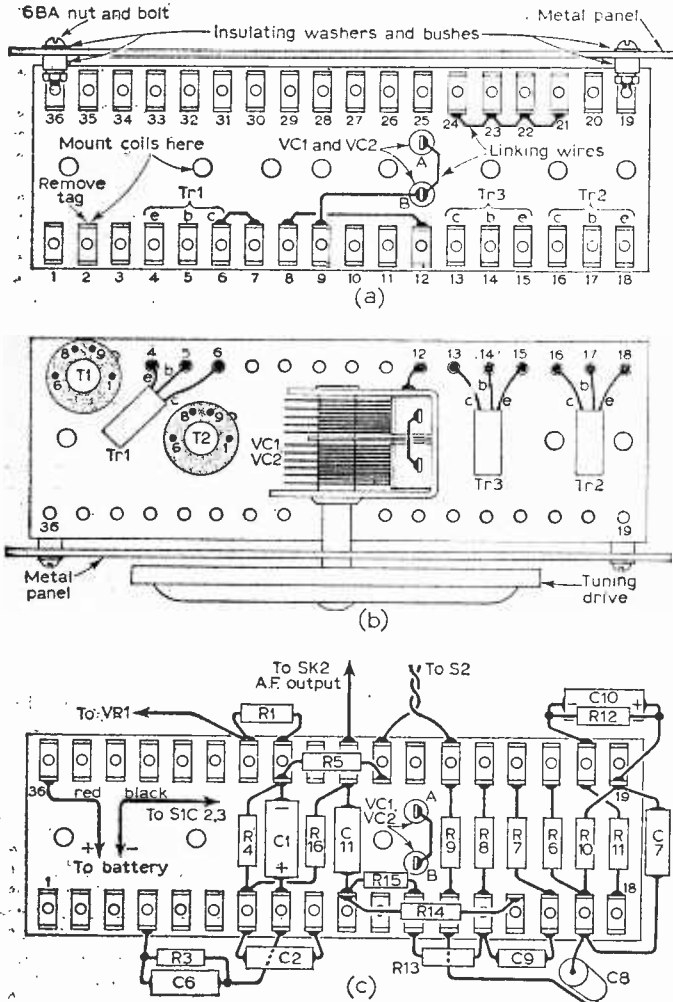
(a) Tag board numbering and mounting arrangement; (b) top view of tag board; (c) tag board wiring.
